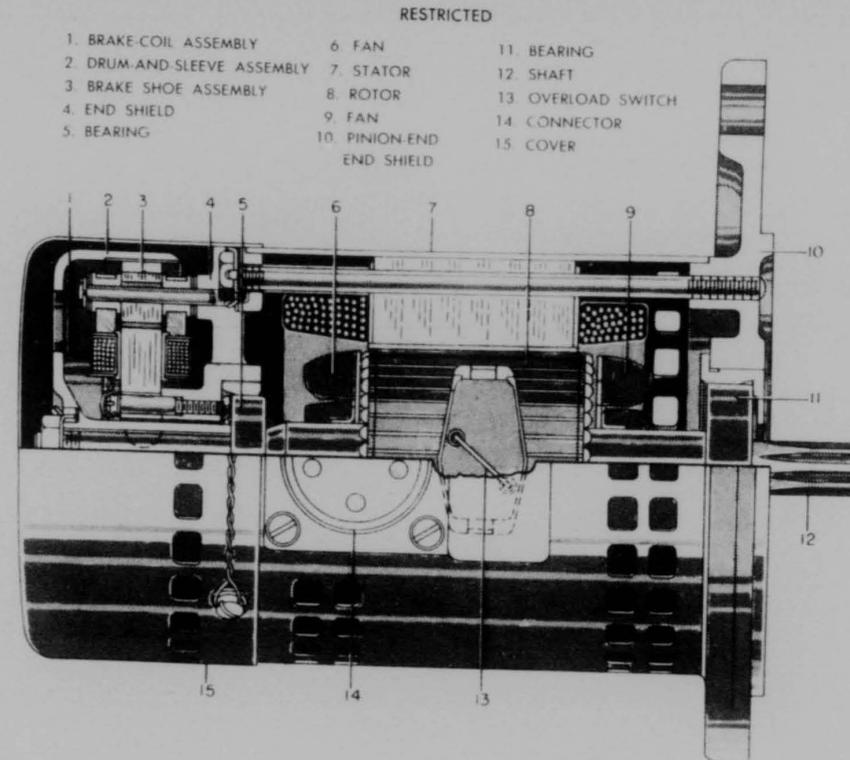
Cutaway View of Motor Model 5K40JJ20.
